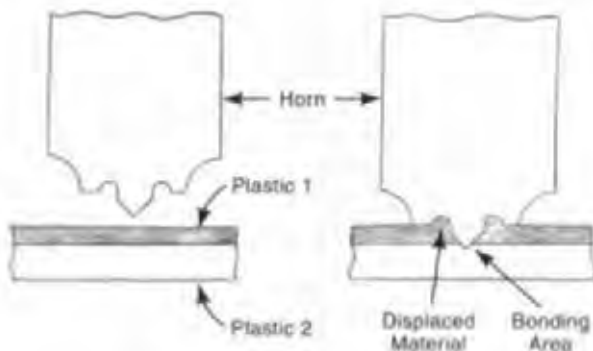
L5 Ultrasonic spot welding of plastic materials.
